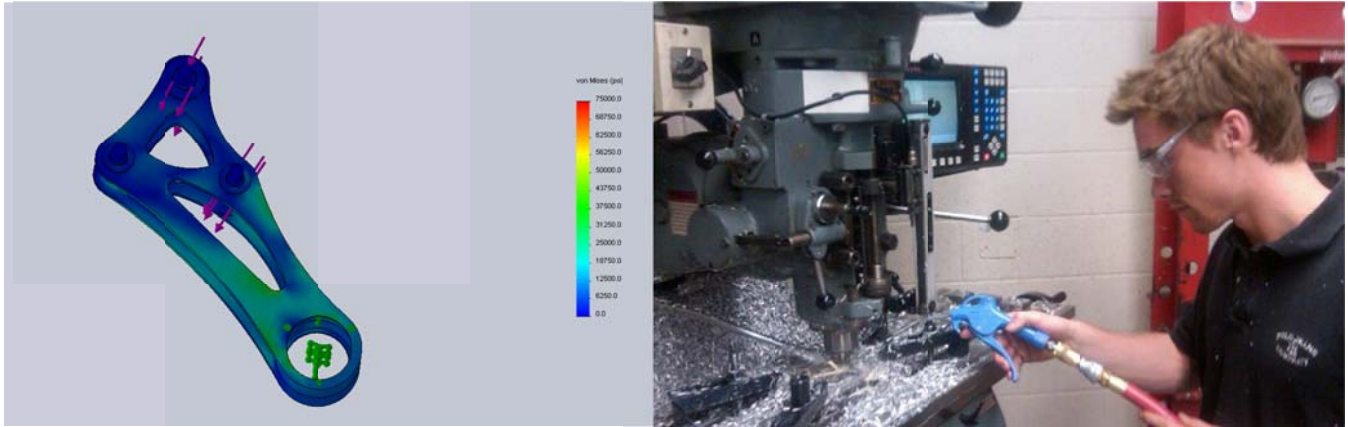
BELLCRANK FEA ANALYSIS AND CNC MACHINING
